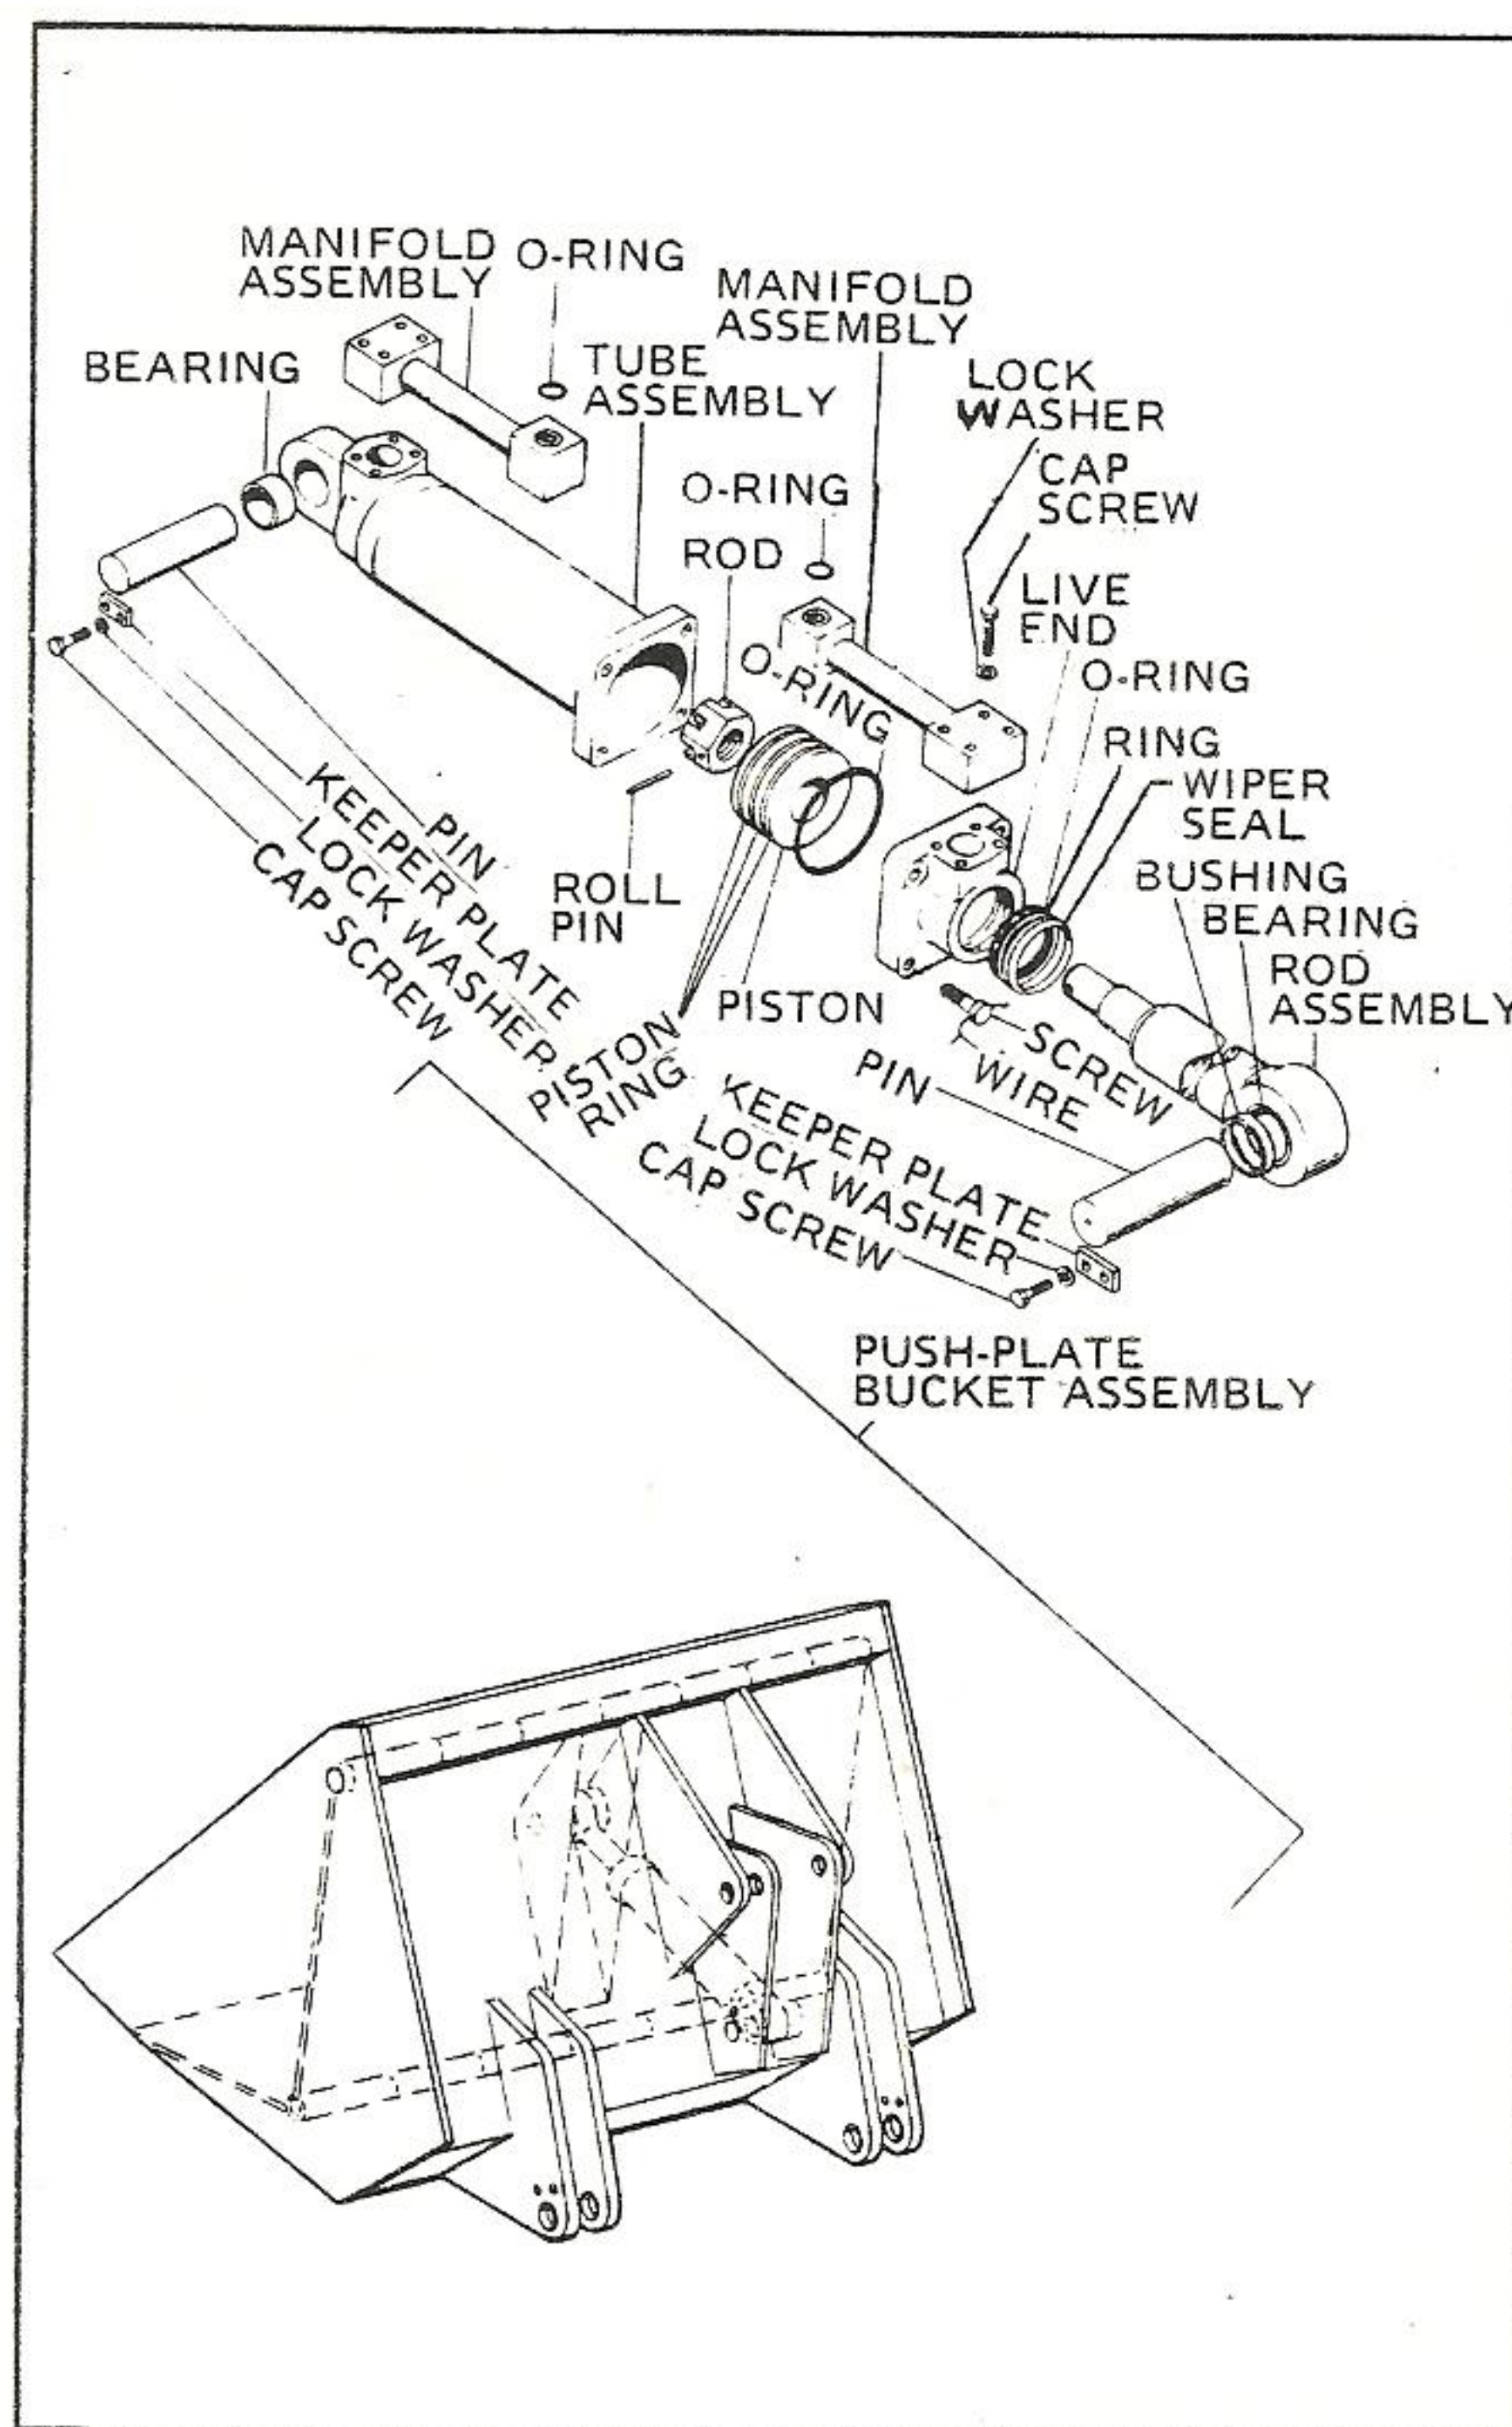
29. PUSH-PLATE CYLINDER
